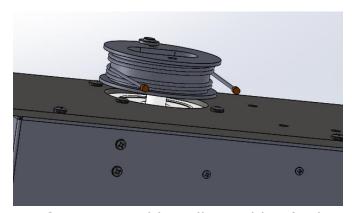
E-Lift Motor Double Pulley Cables (right side view)
